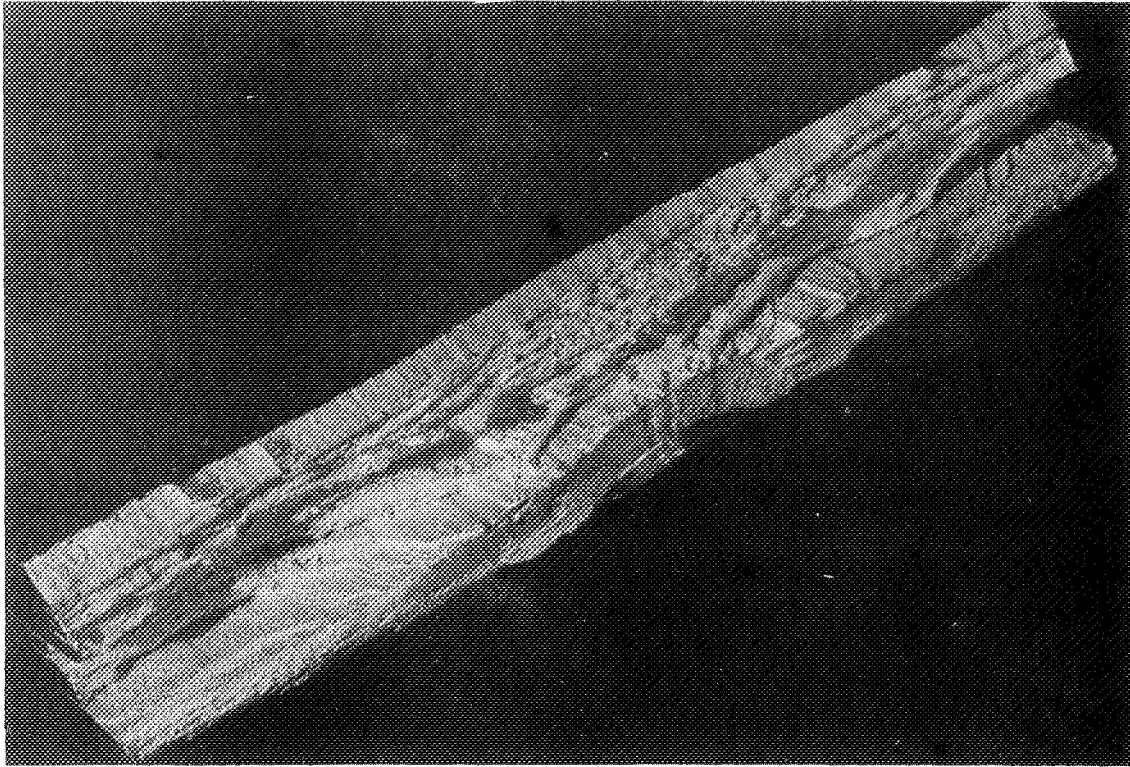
Fracture Face of an Al X7007-T6 Surface-Flawed Specimen,
